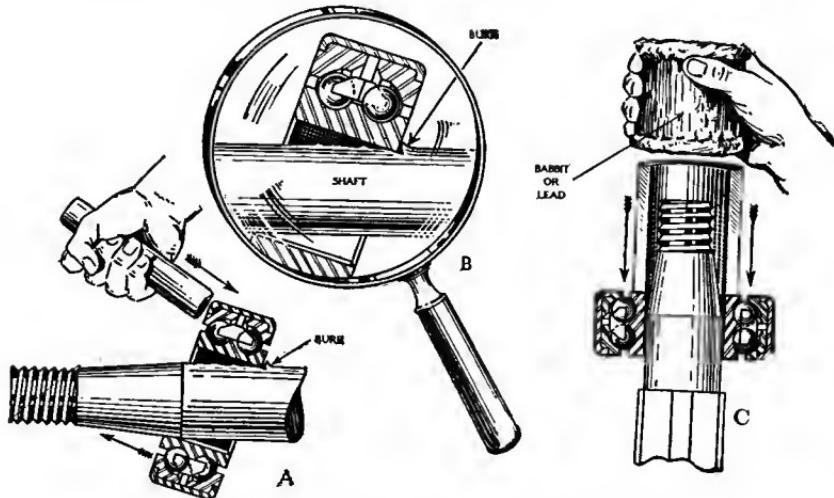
Wrong and Right Methods of Installing Bearing on Shaft
